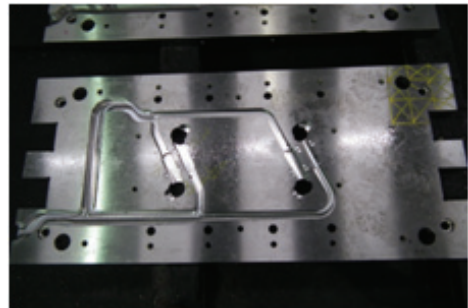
Photograph of machined hot-runner mold by 2D Auto-CAM
